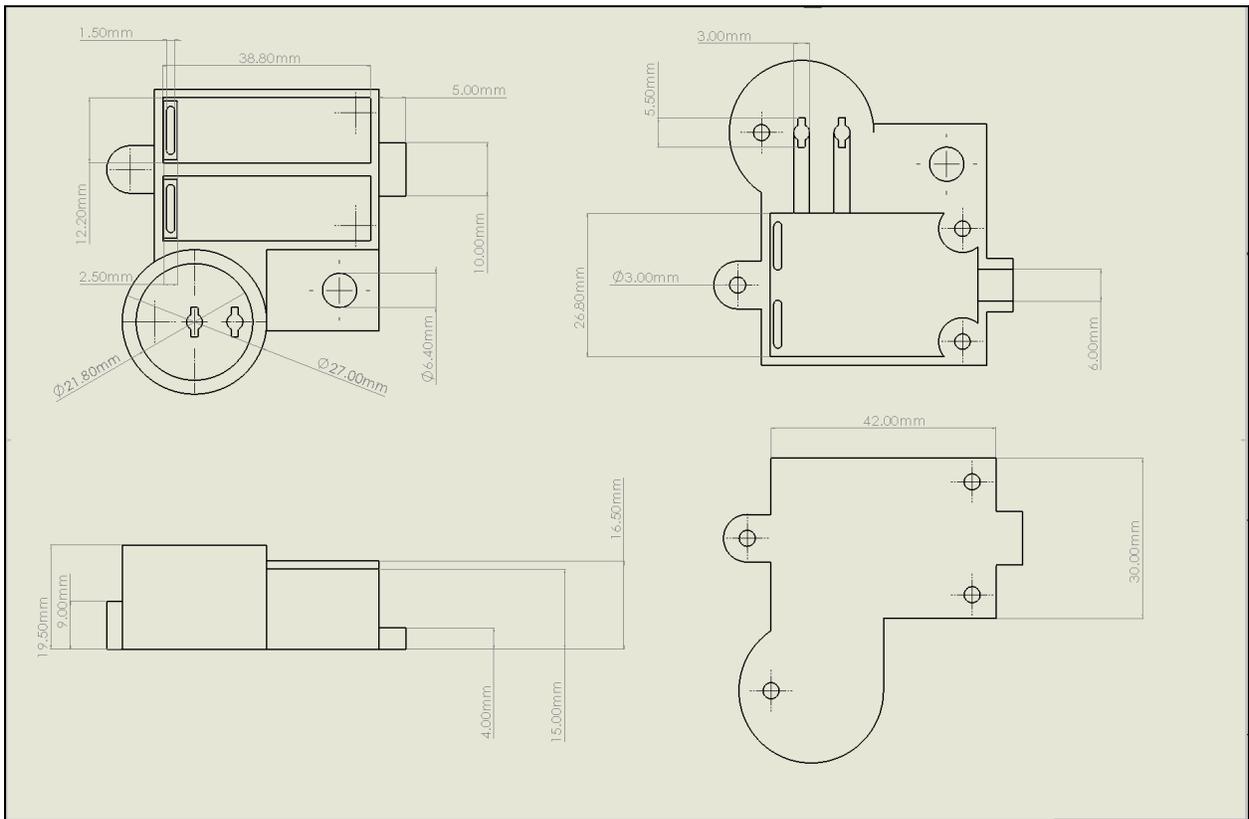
Display and trial switch holder CAD and dimensions (mm).
